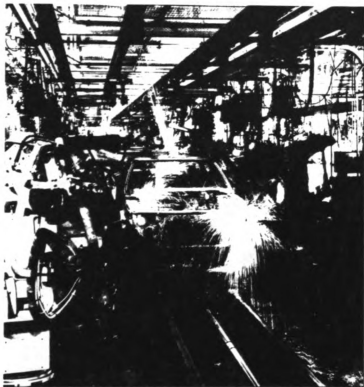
The Robogate system, a cluster of ten robotic resistance spot welders, puts the finishing weld touches on car bodies at Cadillac's Detroit-Hamtramck manufacturing plant.
